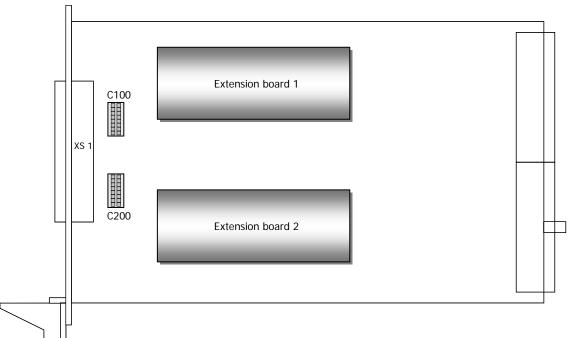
Component side of a PXI 3090 communication board (schematically)
